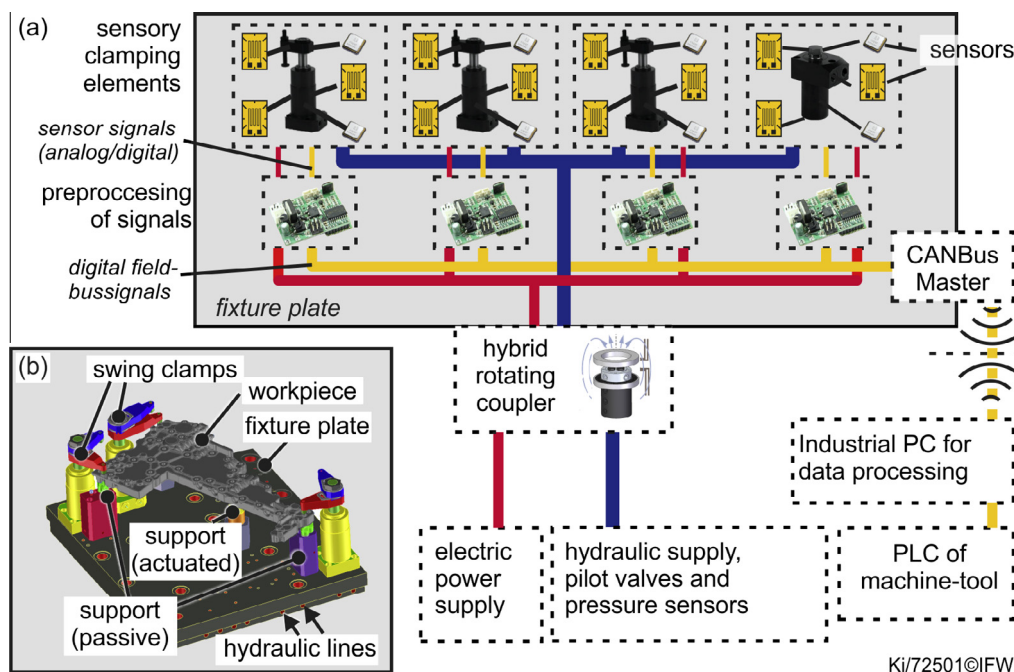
(a) System overview and (b) hydraulic clamping fixture.
